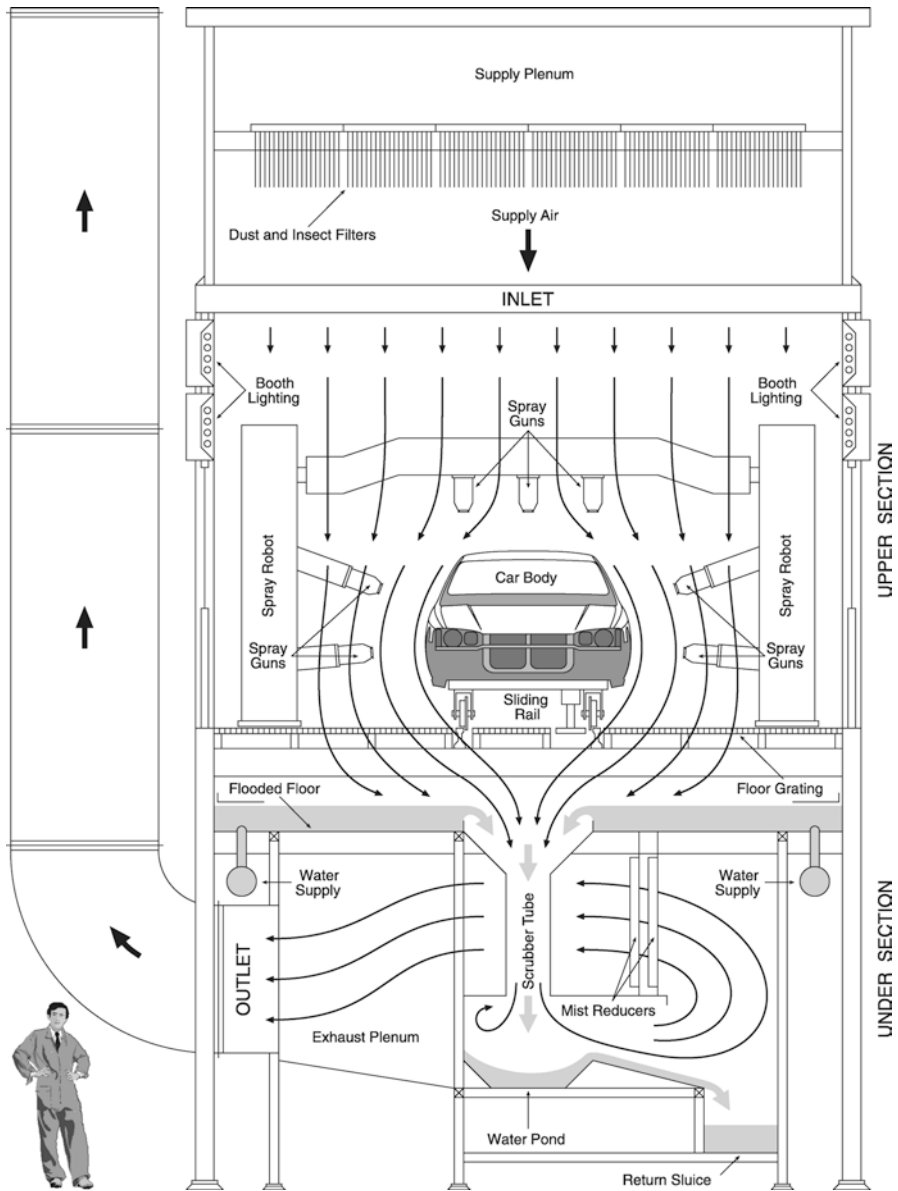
Schematic view of a typical automobile assembly plant spray booth
